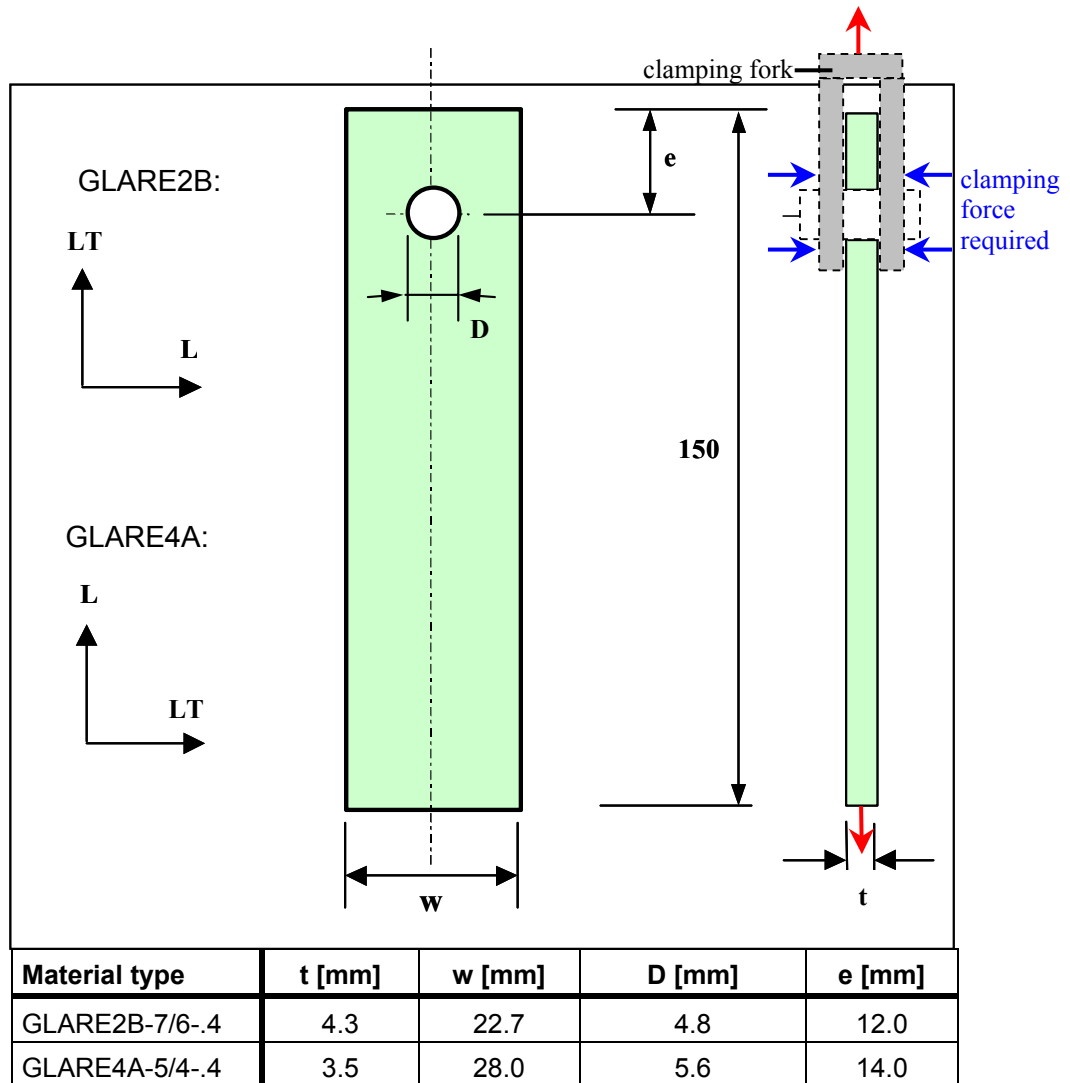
Geometry of the pin loaded hole( bearing) specimens
